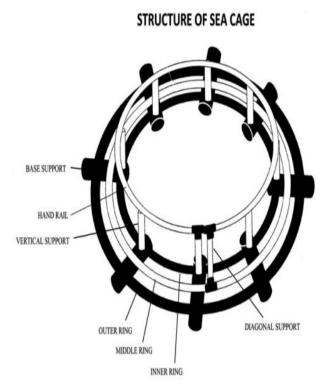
Plan View of HDPE Sea Cage Frame – Collar Rings and Handrail
